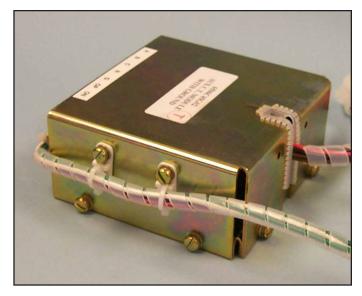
Sensor Harness Secured to the Right Side of the Aux. CT Module.
